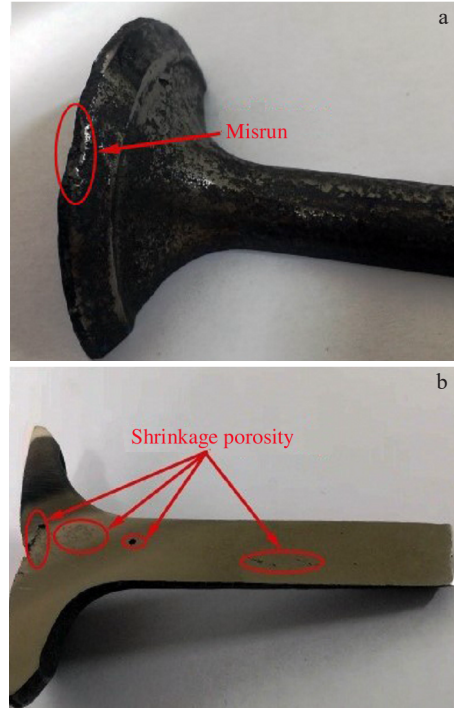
Macroscopic defects in actual castings: (a) misrun and (b) shrinkage porosity
